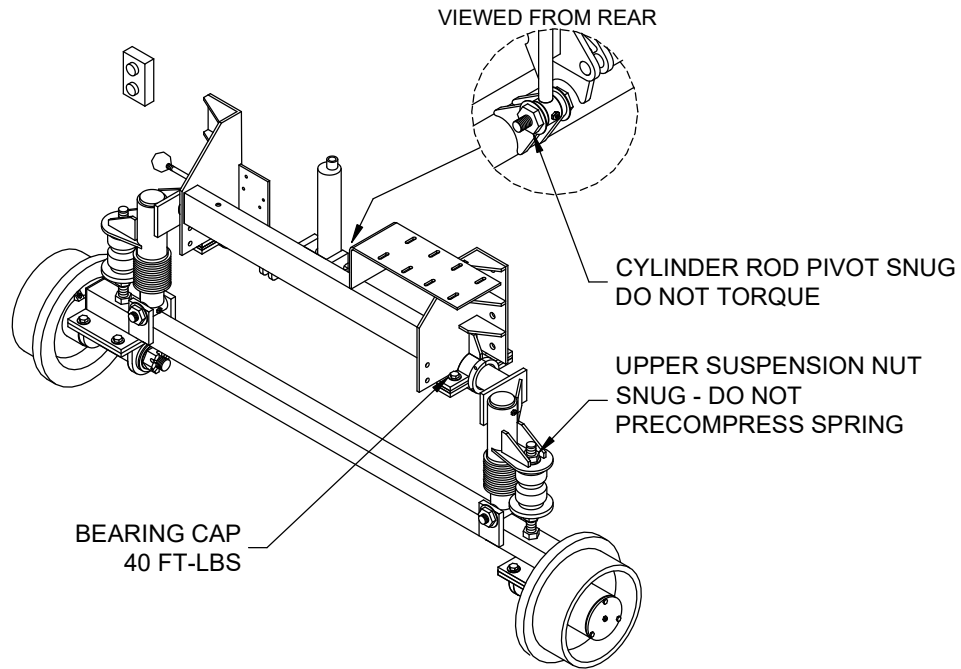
REAR RAILGEAR NON-STANDARD BOLT TORQUES
